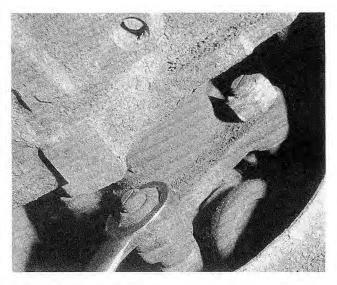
Rear driveshaft mounting bolts being removed.
